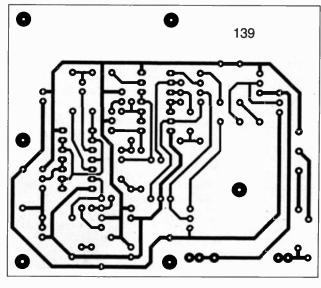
Printed circuit board component layout and full size underside copper foil master pattern for the Dual-Output TENS Unit.
